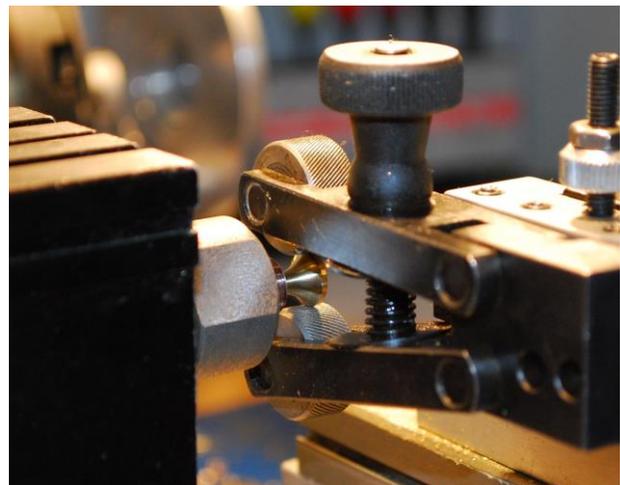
The radius has been turned on the rating nut and a scissor-type tool is used to cut the knurl.
